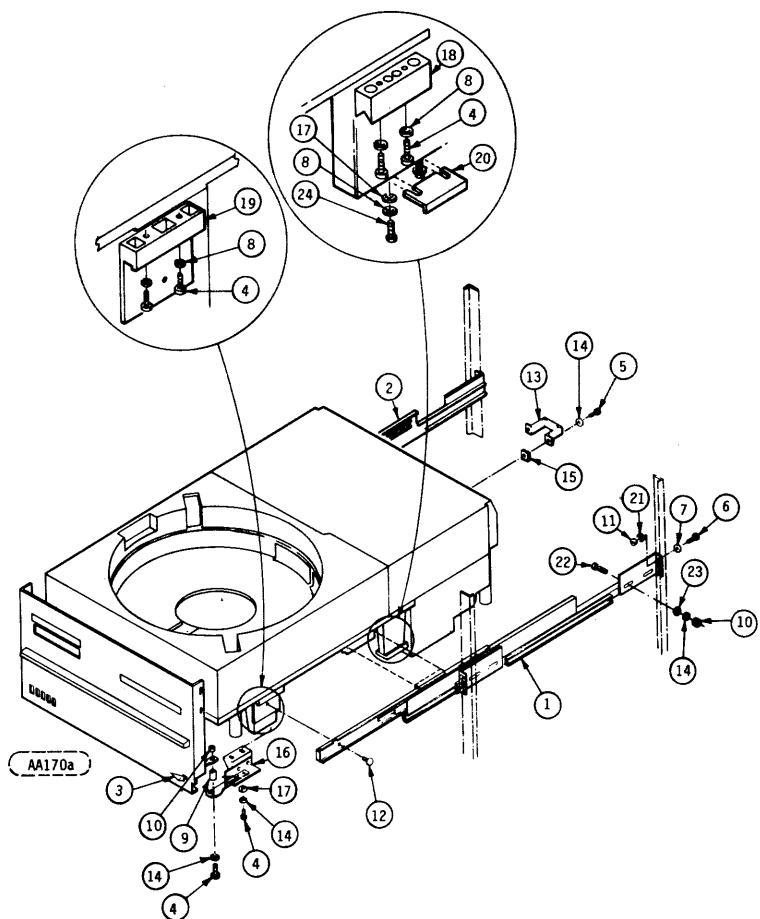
RACK ASSEMBLY MOUNTING
